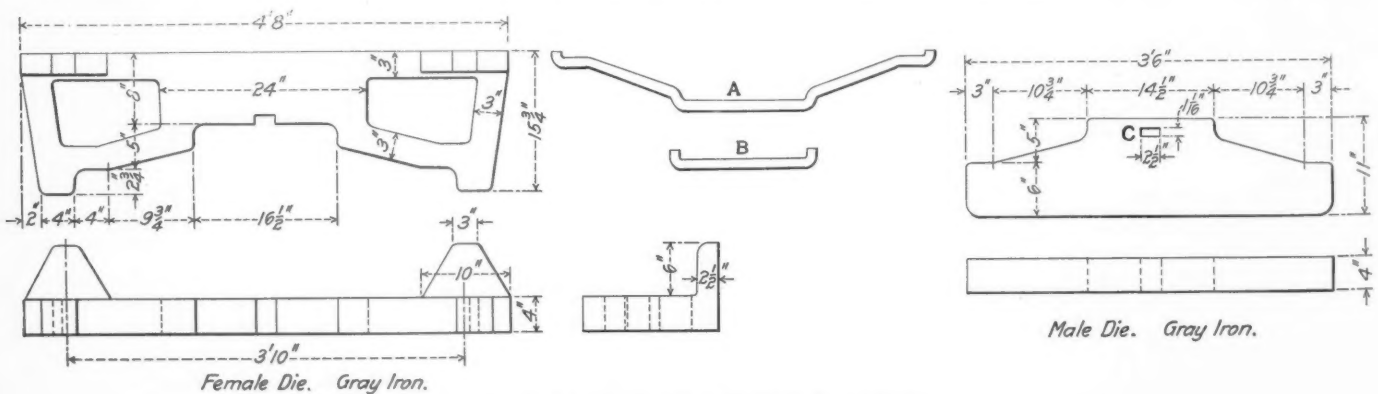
Bulldozer Dies for Forming Carry Irons.
